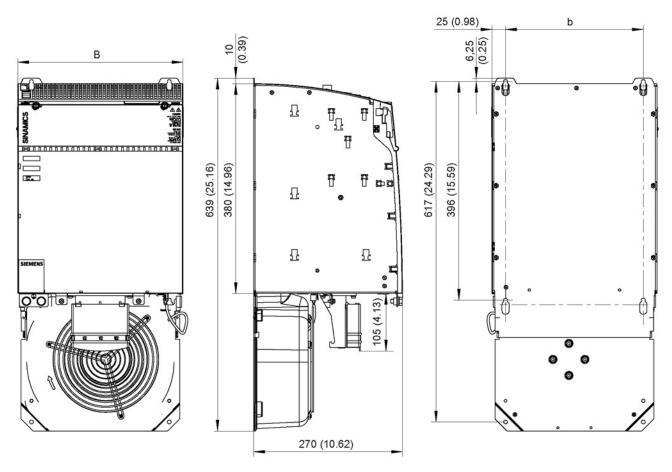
Dimension drawing of Motor Modules Booksize with internal air cooling 132 A and 200 A, all dimensions in mm and (inches)
